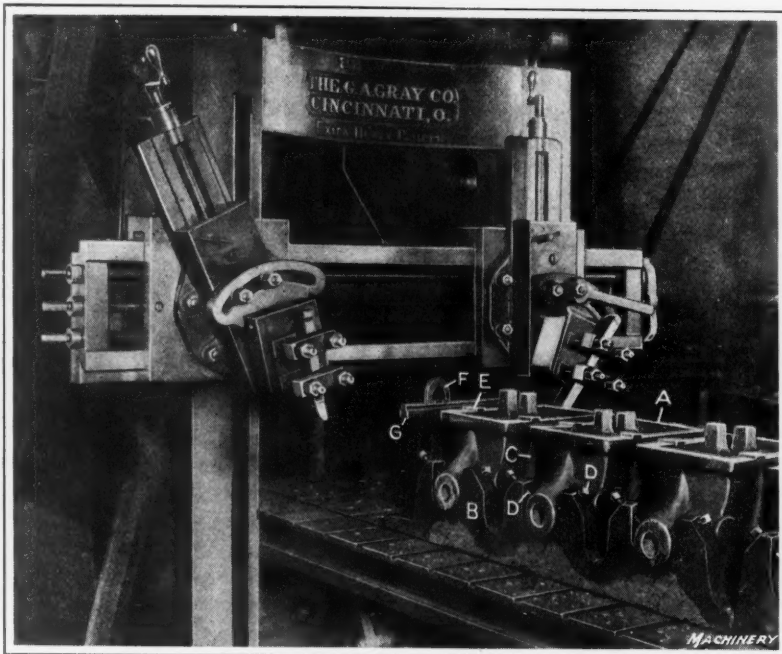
Close-up View of Tools and Work on Machine used for planing Base of Top Castings for Lathe Tailstocks
